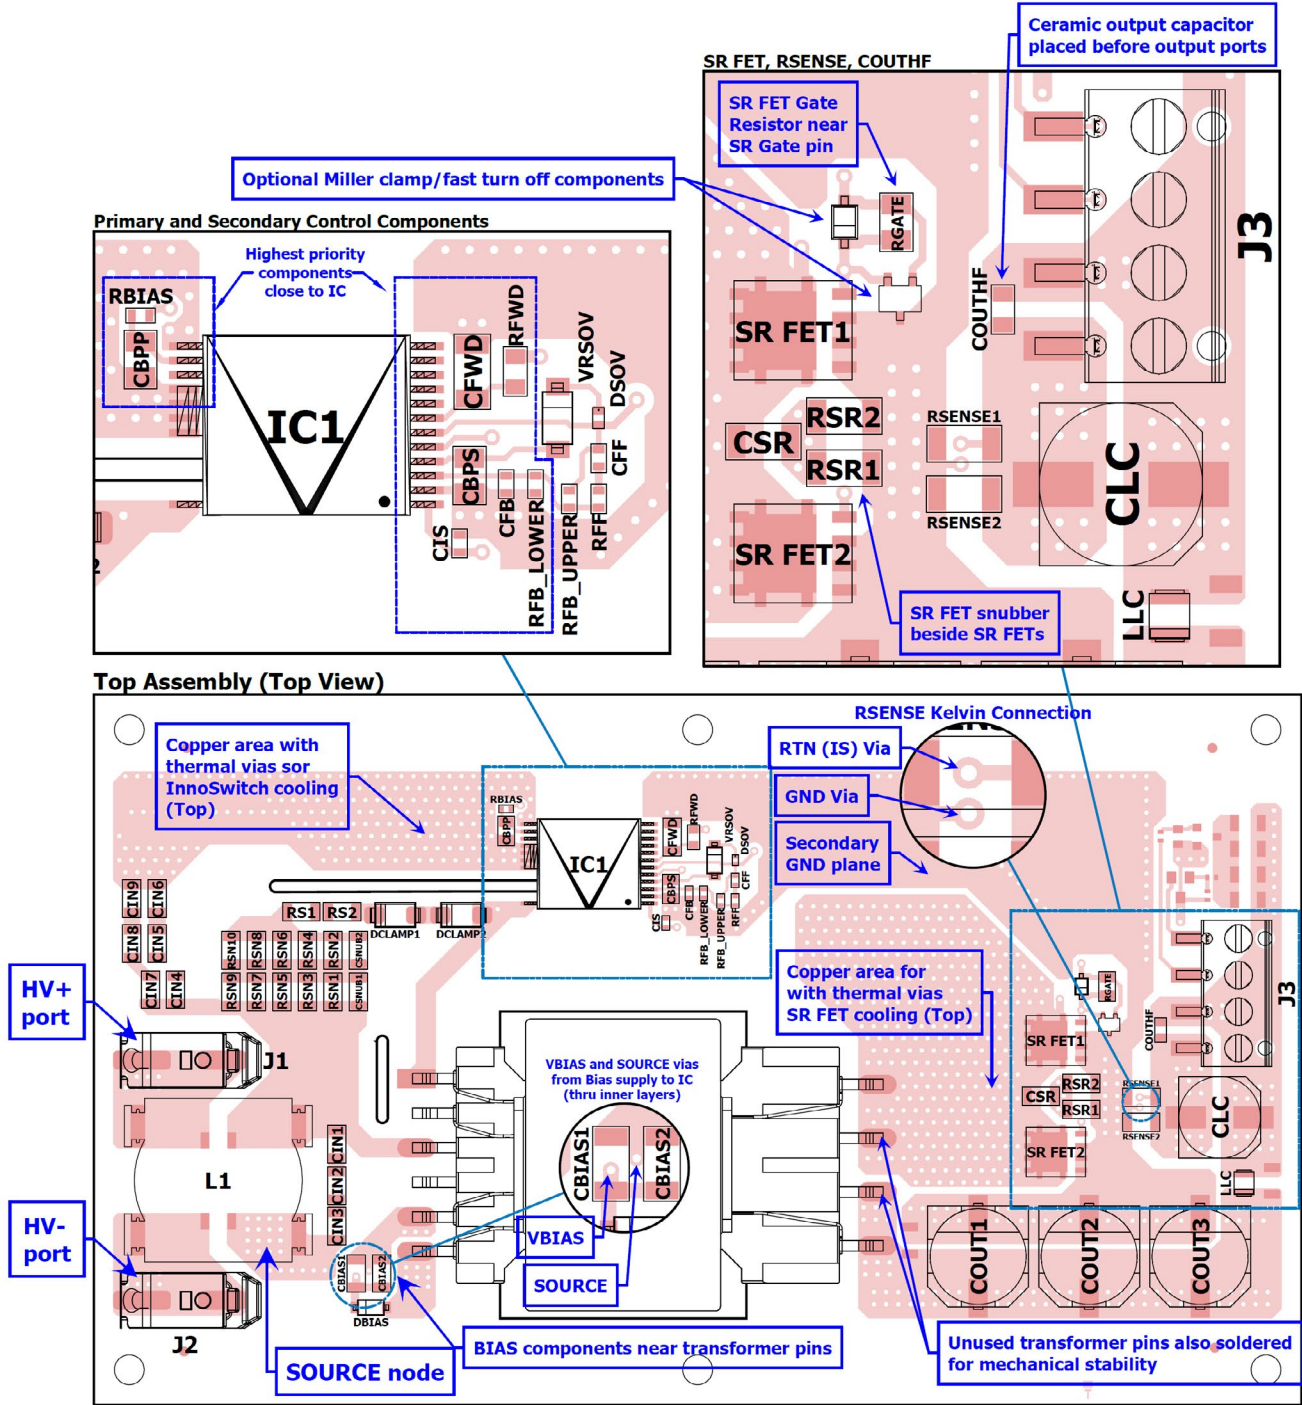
Layout Example for Design with Top Assembly Only (DER-948Q - Top).
